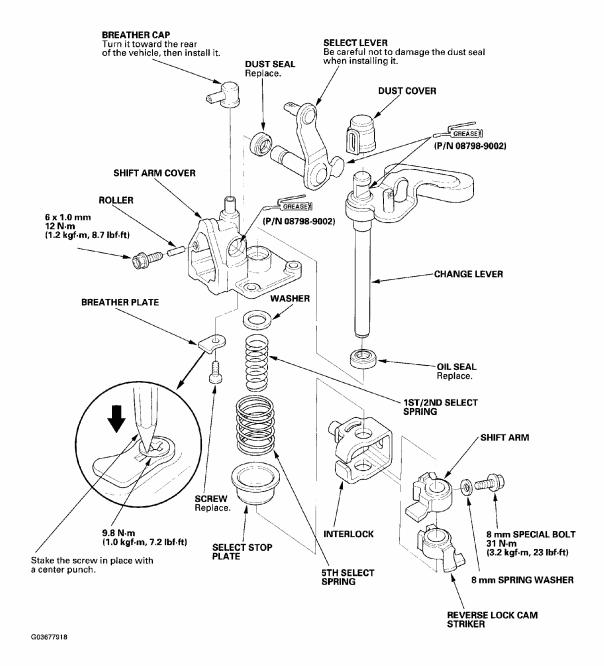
Disassembly/Reassembly Of Change Lever Assembly And Torque Specifications
